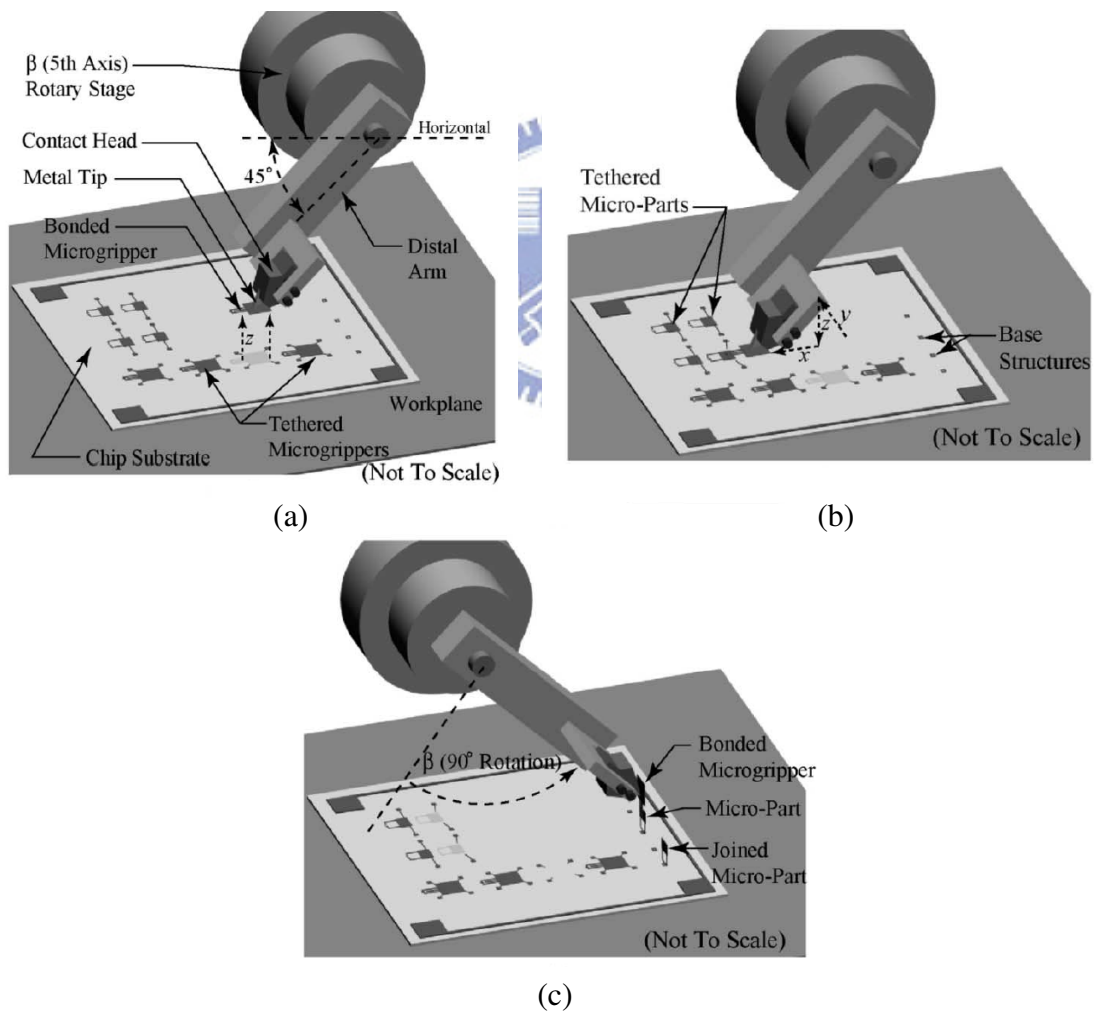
(a) Solder bonded metal tip is attached to the pad, (b) the micro-part is grasped by the microgripper, (c) the micro-part is inserted in the slot [21].
